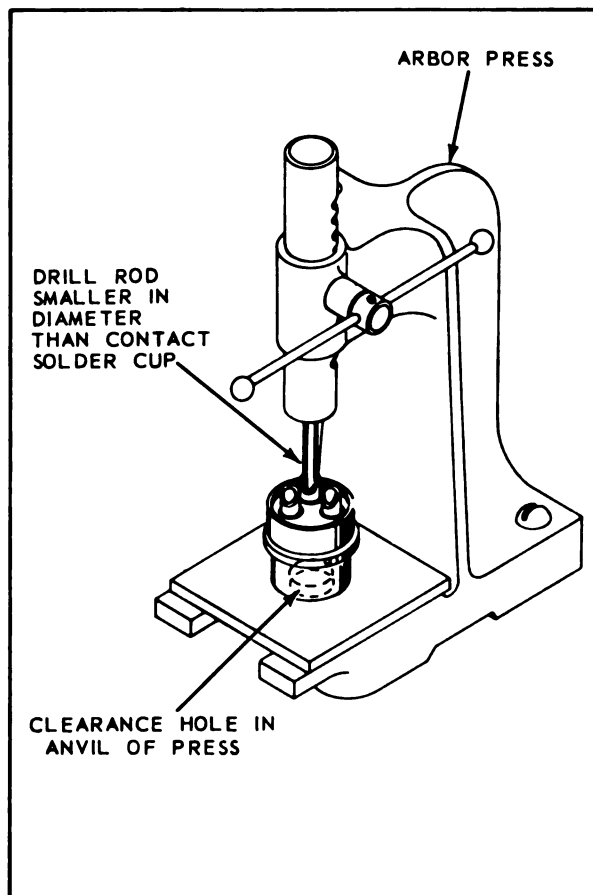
Removal of Solder Contacts from Resilient Insert
